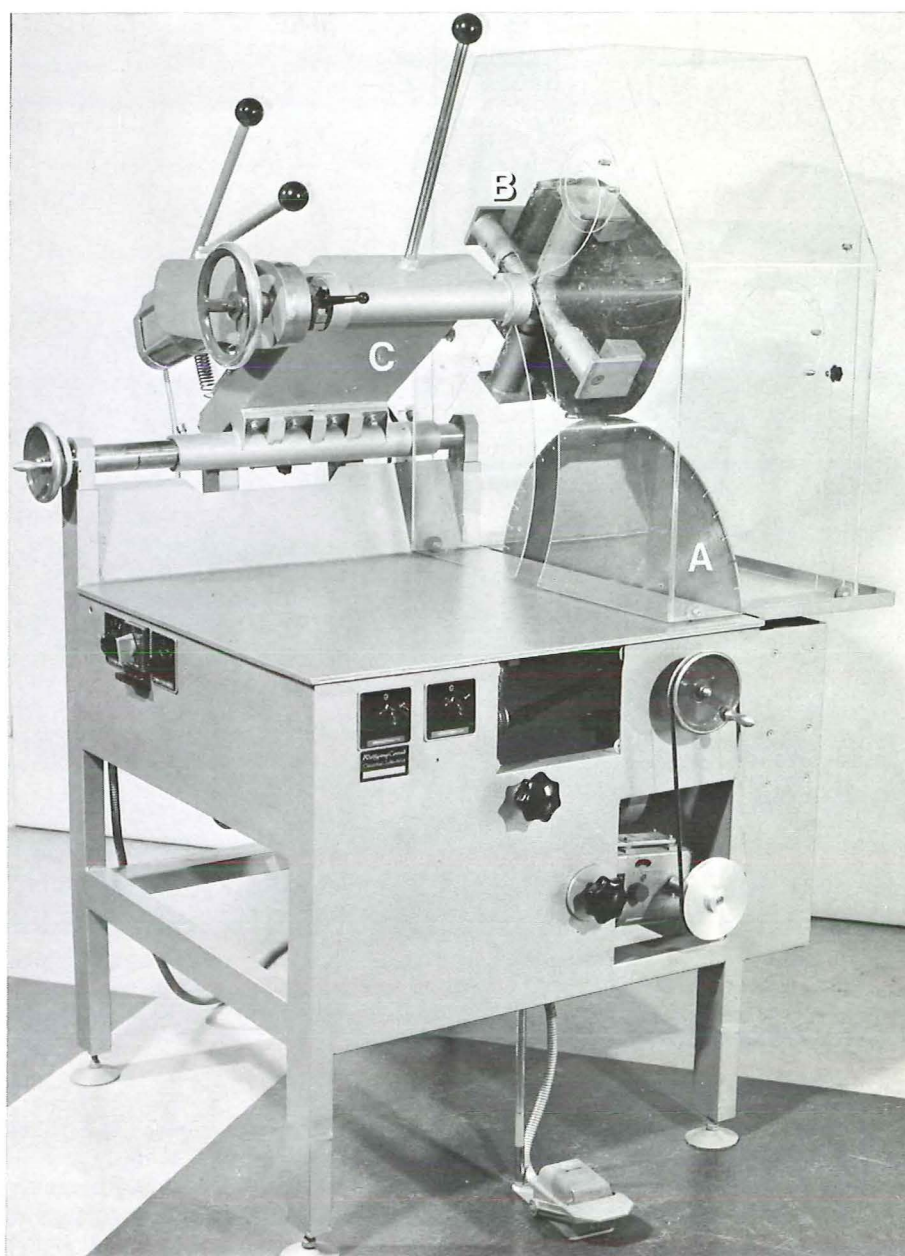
The Woco 220/700 universal sawing machine. On the picture the machine is equipped with a sawing disc of 700 mm in diameter (A). The sample is fixed in a revolving clamping device (B), which is connected to a swivelling arm (C). This arm can move downwards and sideways.
